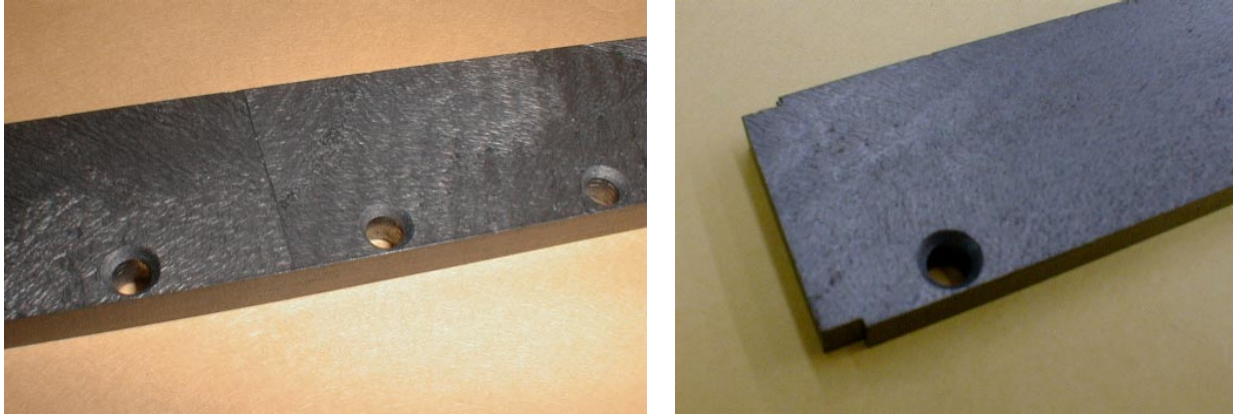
solid 3D CC thermal wall piece before assembly into concept 1 prototype; the deep recess for the PC boards is machined after assembly, removing most of the material.
